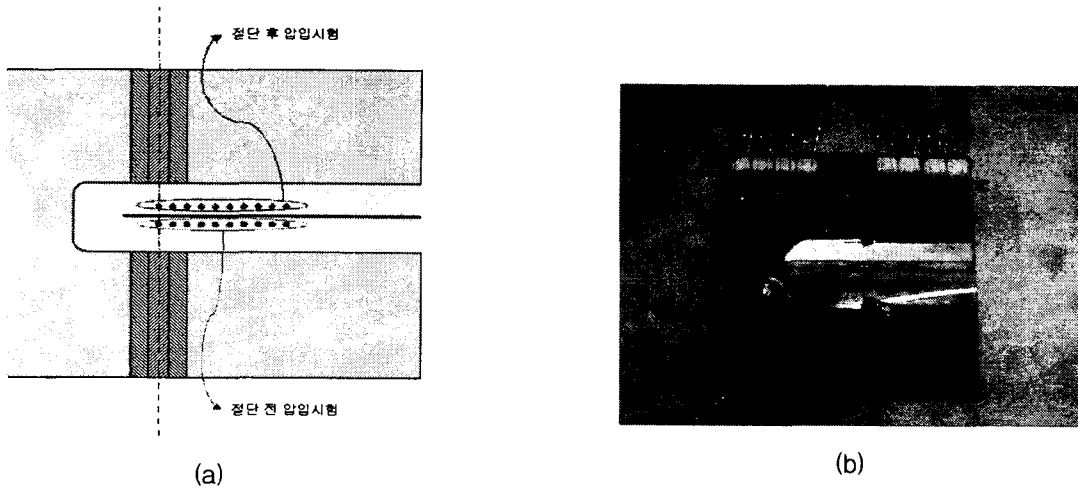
(a) Schematic and (b) actual view of tested specimens, on which both saw-cutting and indentation were performed.
